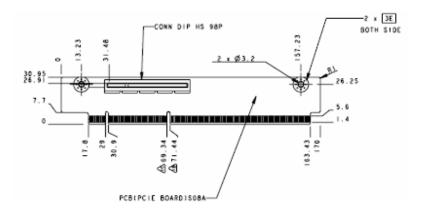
1U PCI Express* Riser Card Mechanical Drawing
